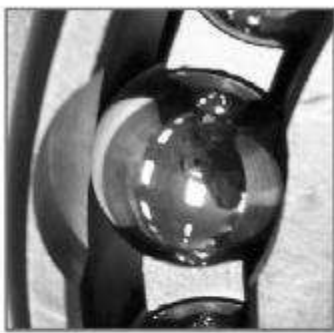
View of a single-row deep-groove filling slot-type ball bearing assembly. (Courtesy of the Timken Company.)
